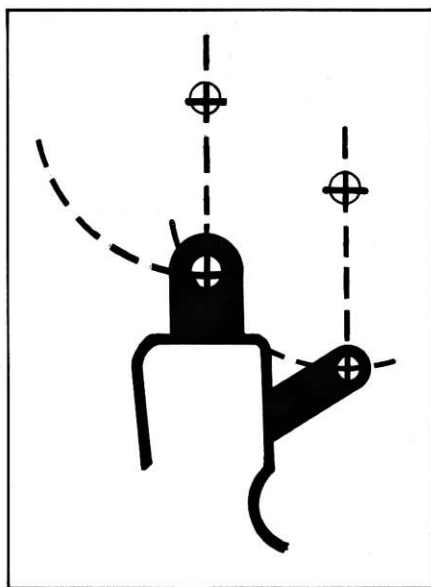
Cross-section (from front) of chain guide of New Dura-Ace front derailleur. Crease in inner cage plate ensures single-point contact with chain.
